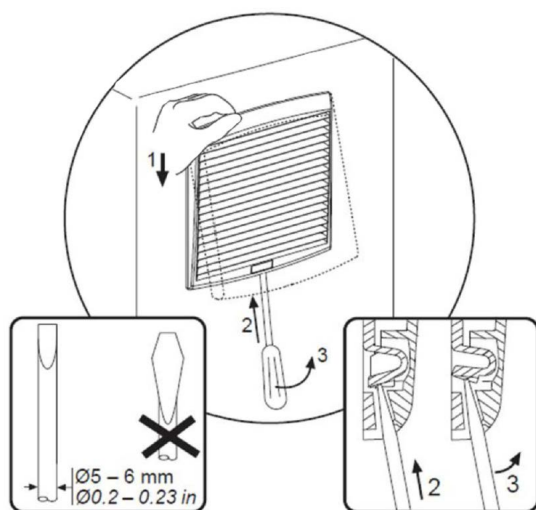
Open Power Drive Element (PDM) to Replace Filter Element.
